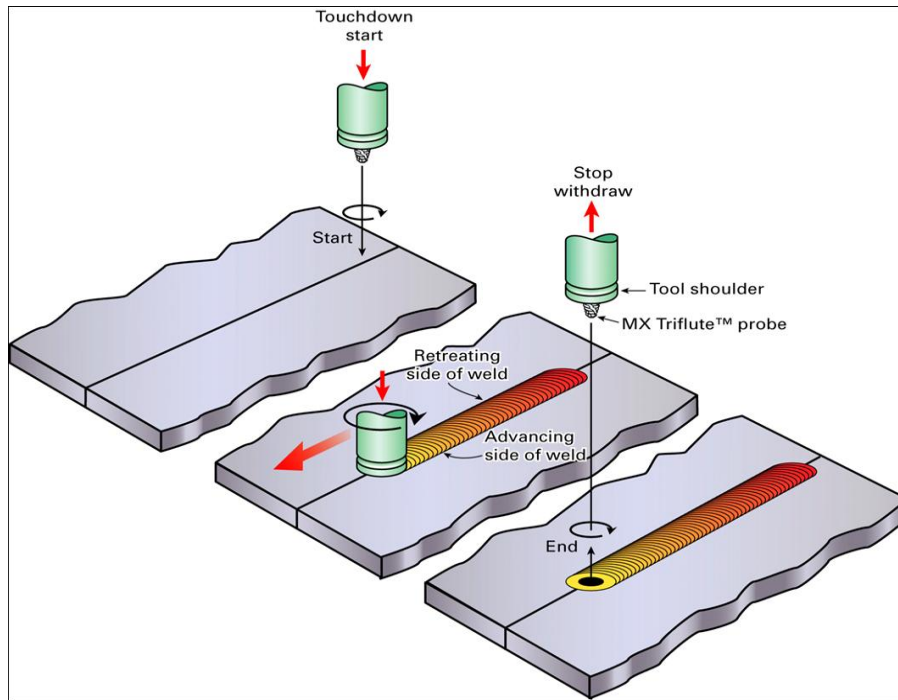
Schematic drawing of friction stir welding, [10].
